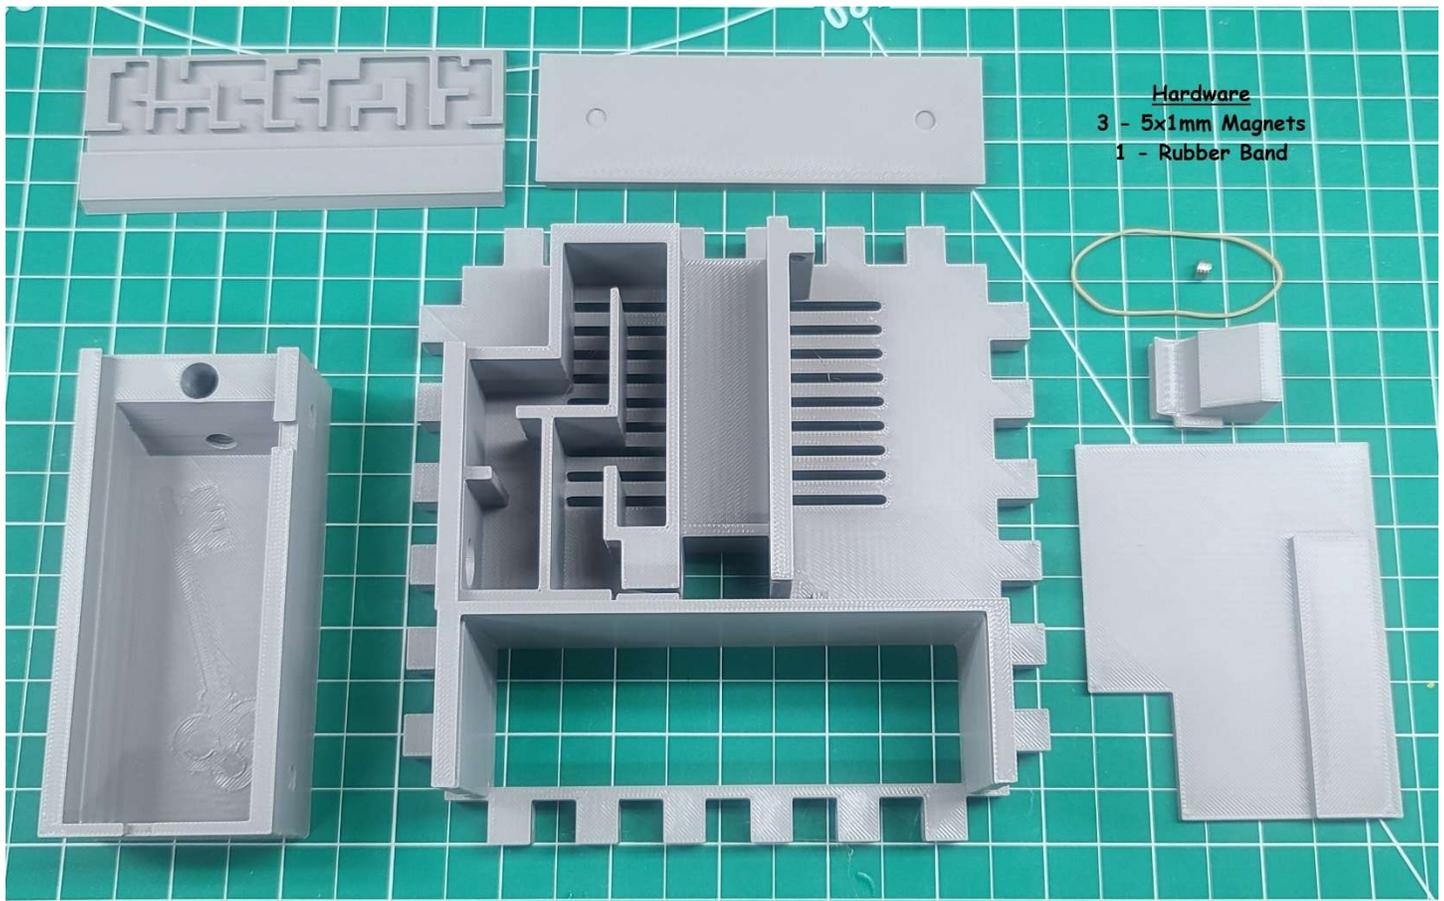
Side 5 Printed Parts and Misc. Hardware
